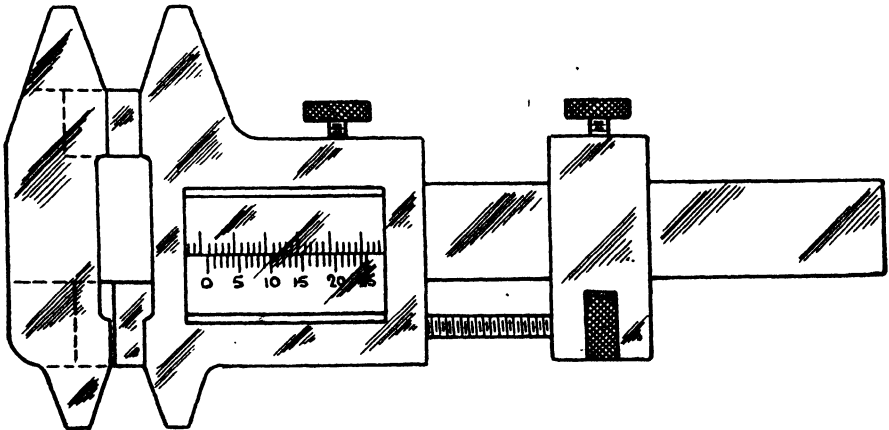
SYKES GEAR-TOOTH CALIPER
